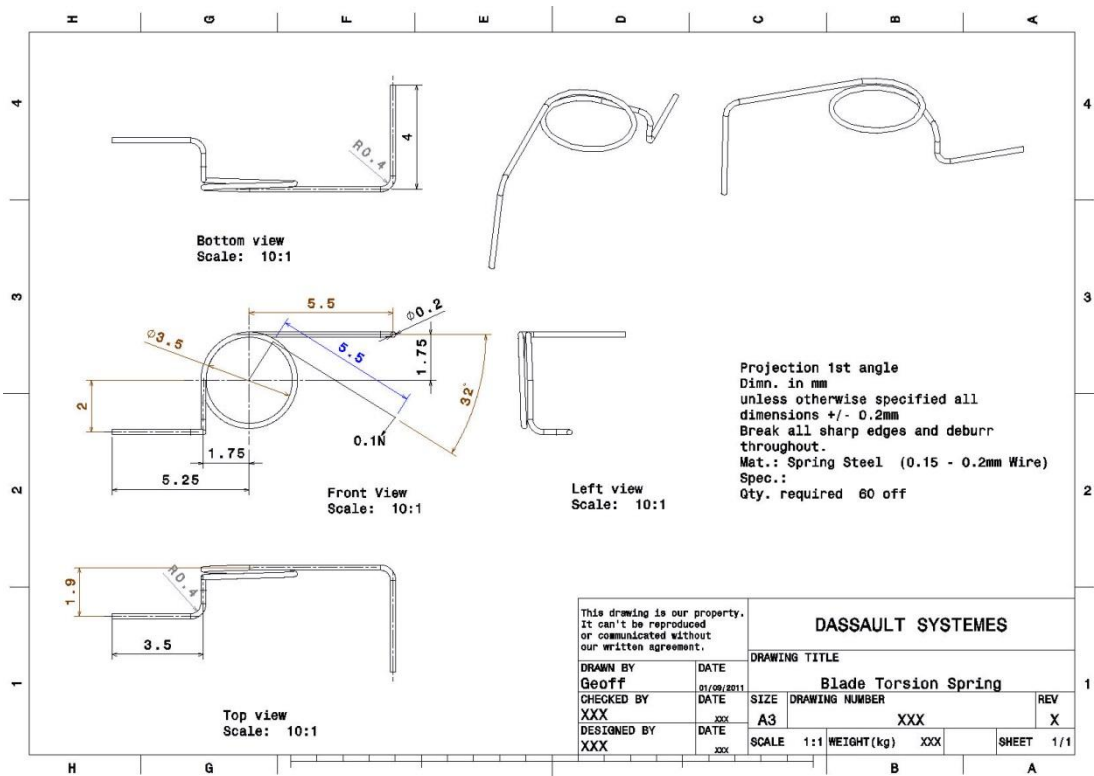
A –Blade Torsion Spring: Mark II Thermal Motor
